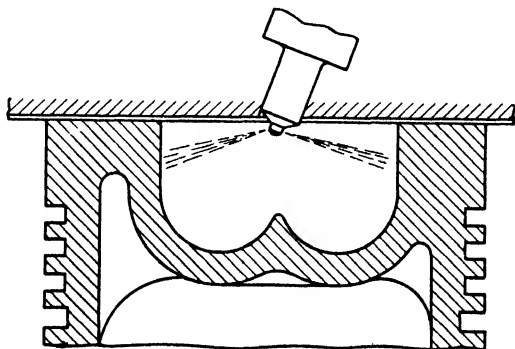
BOWL-SHAPED COMBUSTION CHAMBER IN PISTON.
